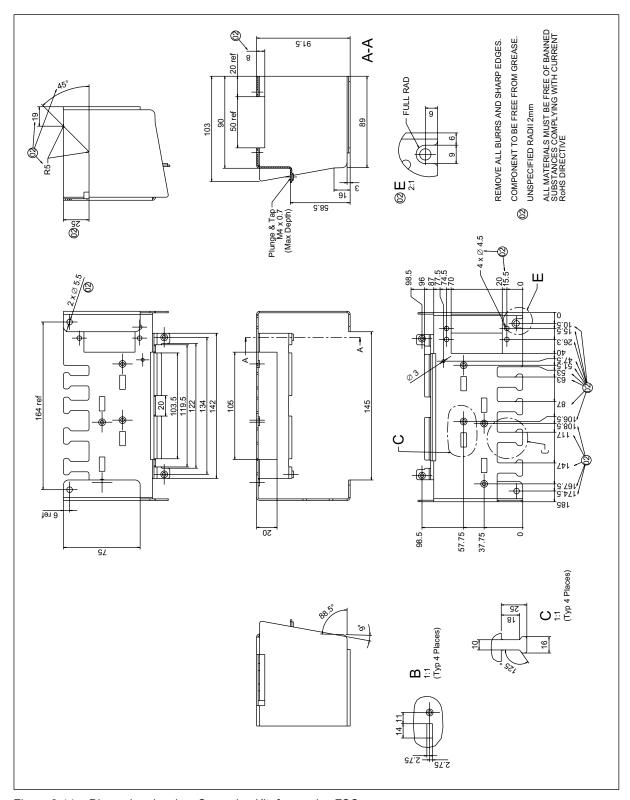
Dimension drawing: Screening Kit, frame size FSC
